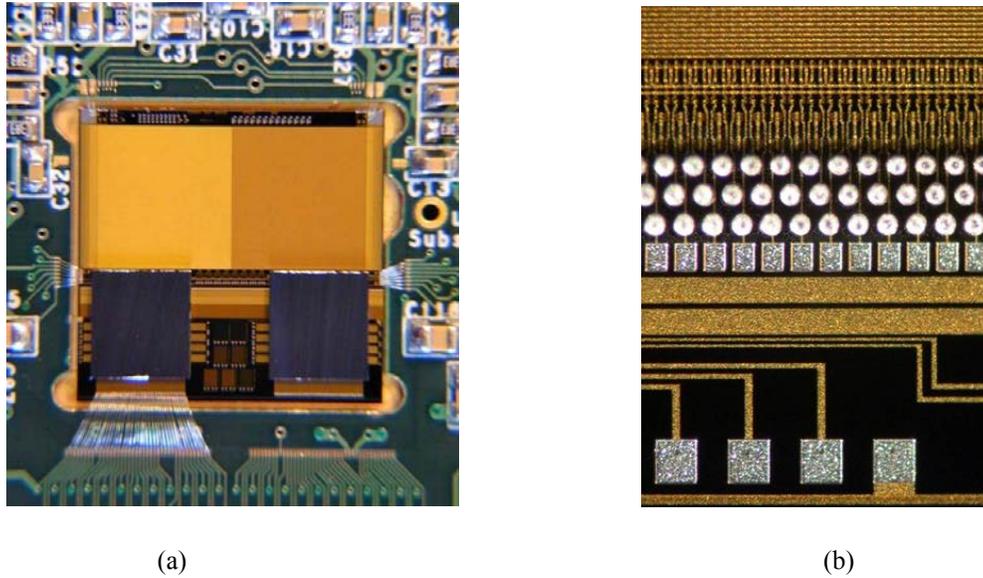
CPC1 with two bump-bonded CPR1 chips in a test PCB (a); and bump bonds on CPC1 after removing a defective CPR1 chip (b).
